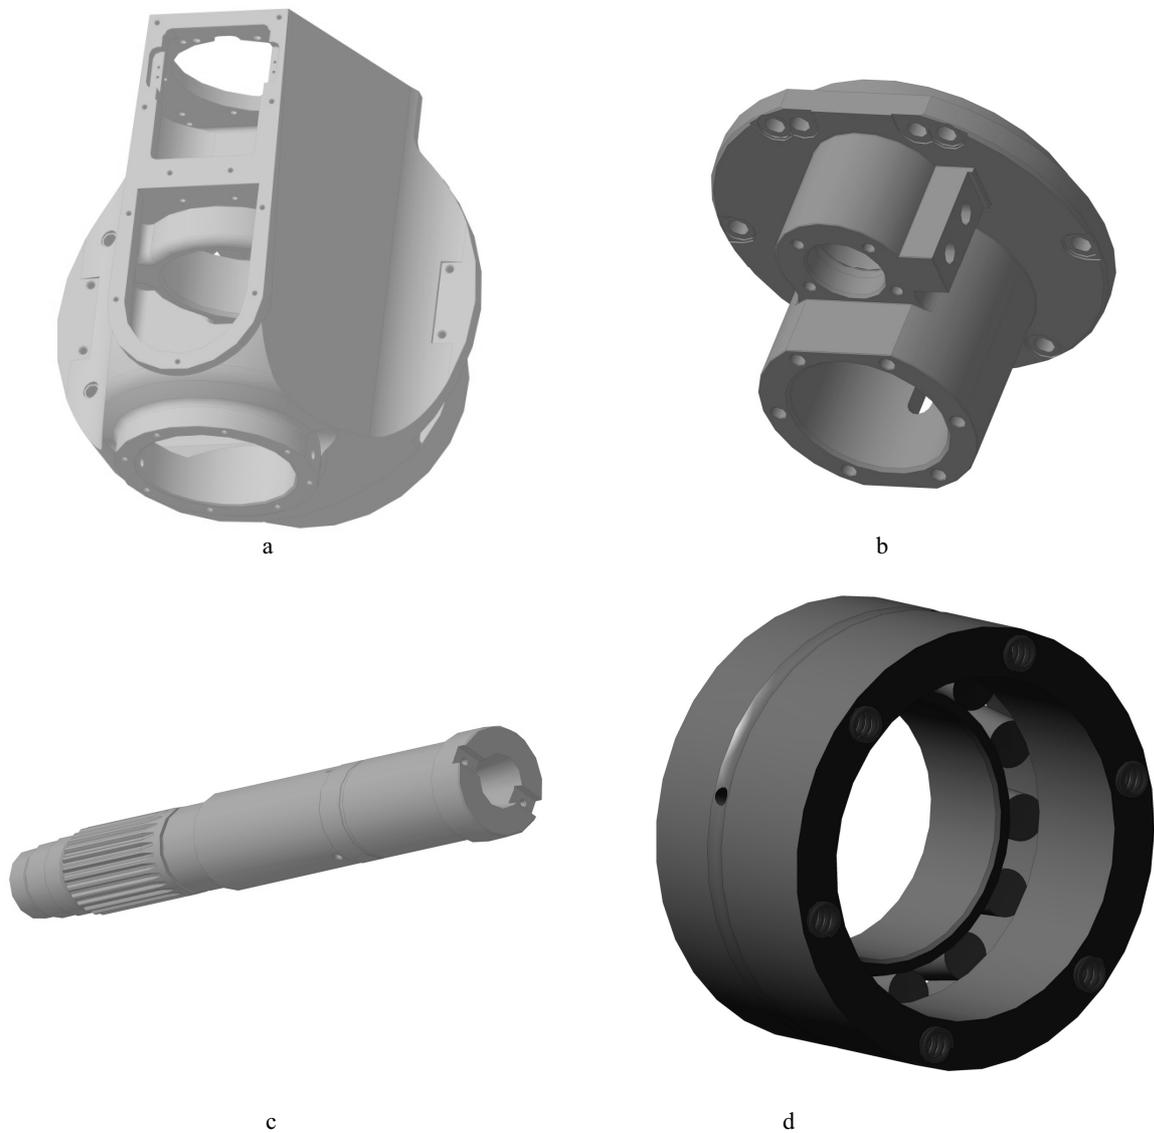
The three-dimensional models of the details spindle's head: a – case of the head; b – case hydraulics block; c – spindle; d – a special roller bearing with spring preload
